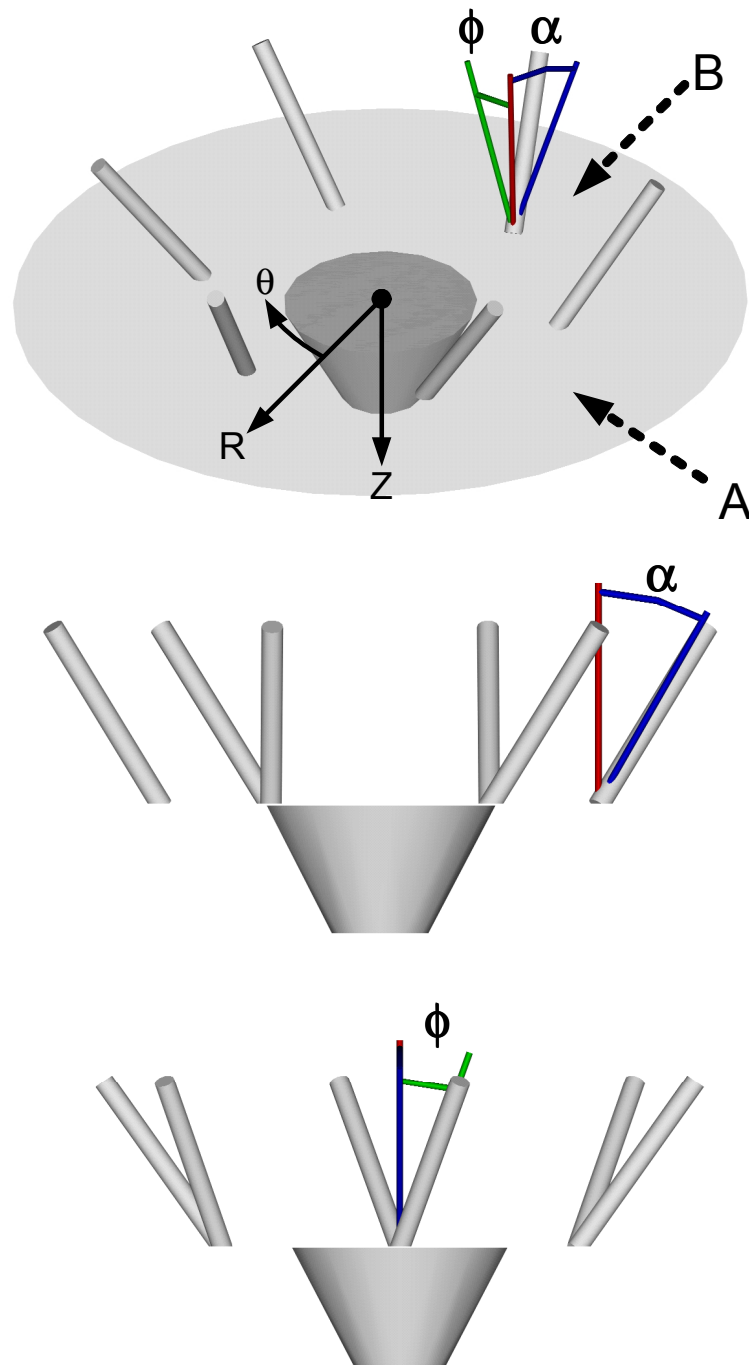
Three views of the die angles in a six hole swirl nozzle. Top – Perspective View, Middle – View from axis A, Bottom – View from axis B.
